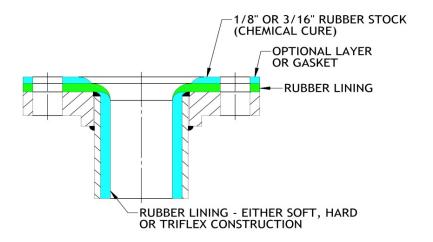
Internal steam cure vessel - Flange detail for outlets (This method is recommended on vacuum equipment)
